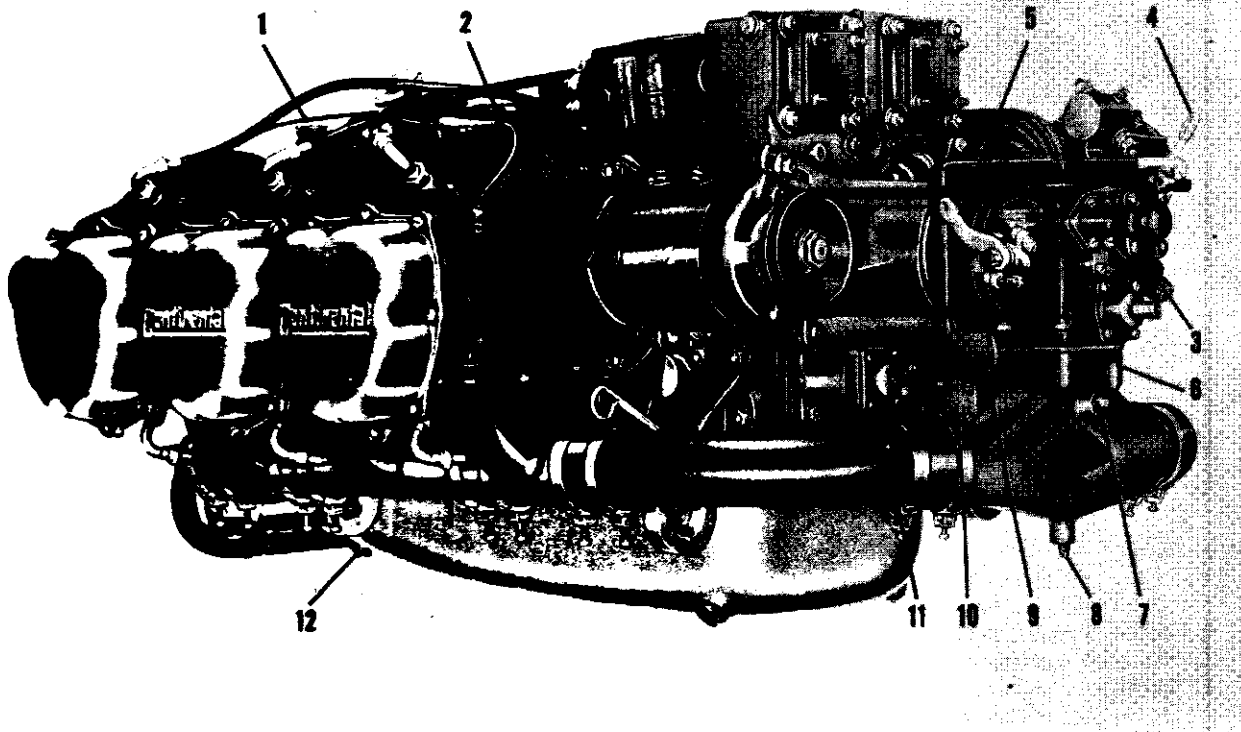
Three-Quarter Left Rear View, Typical of O-470-A and O-470-J Engines
